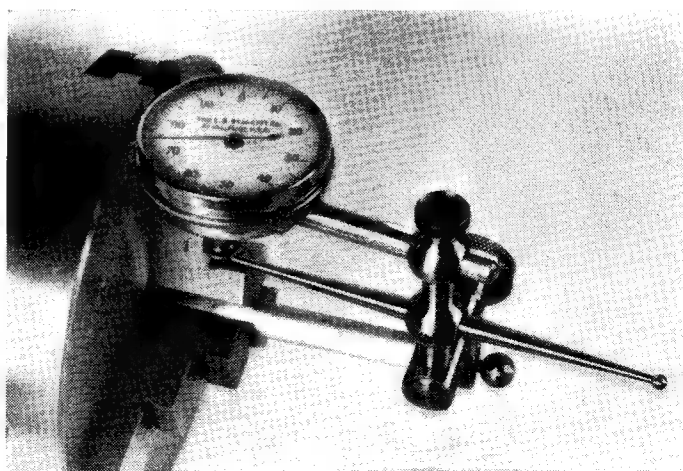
The dial test indicator with the reverse attachment mounted in the lathe chuck
